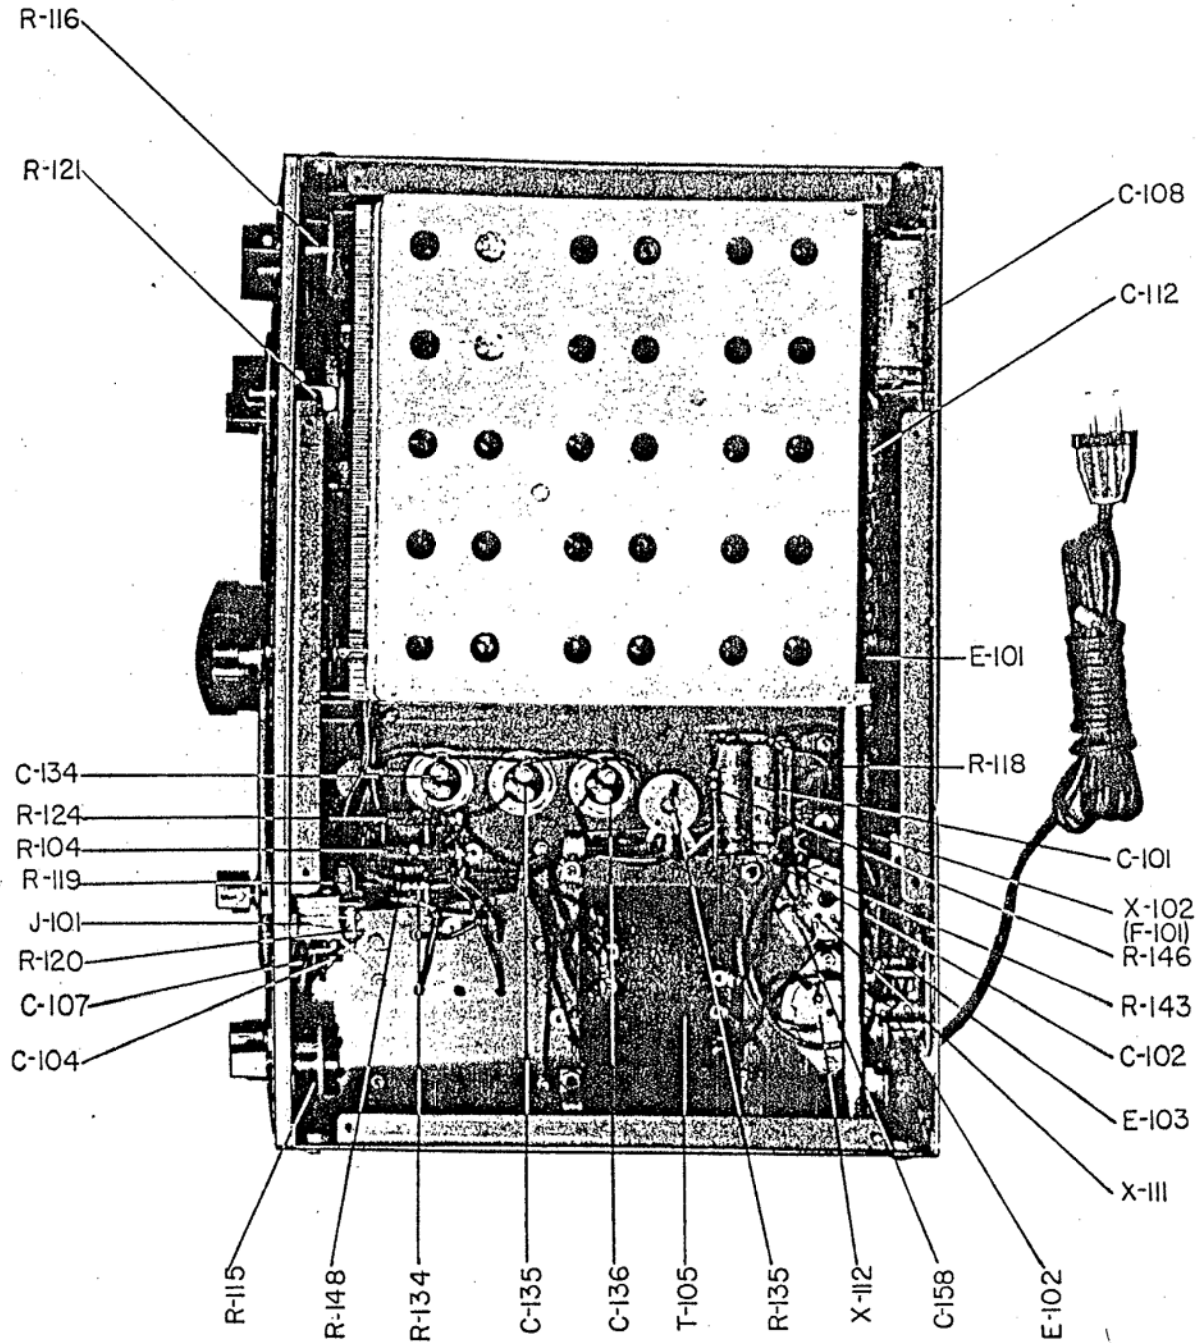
BOTTOM VIEW OF RECEIVER
